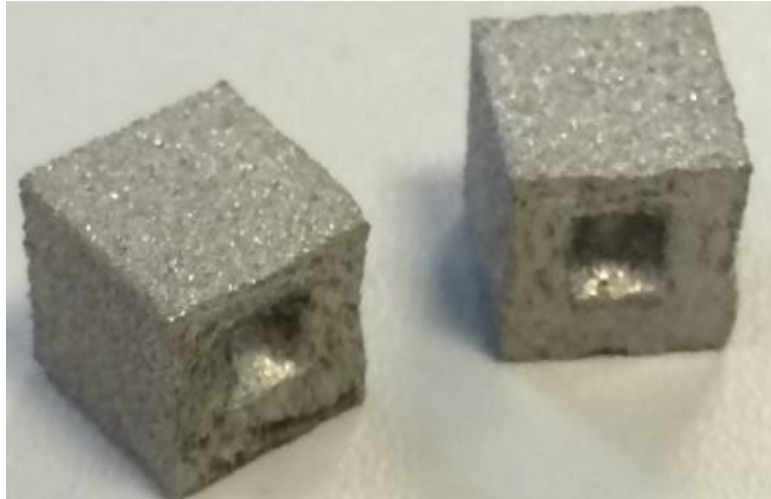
HIP'ed samples of T1_3 and T1_4 with shrinkage on the bottom face due to induced defect is off-centre located
